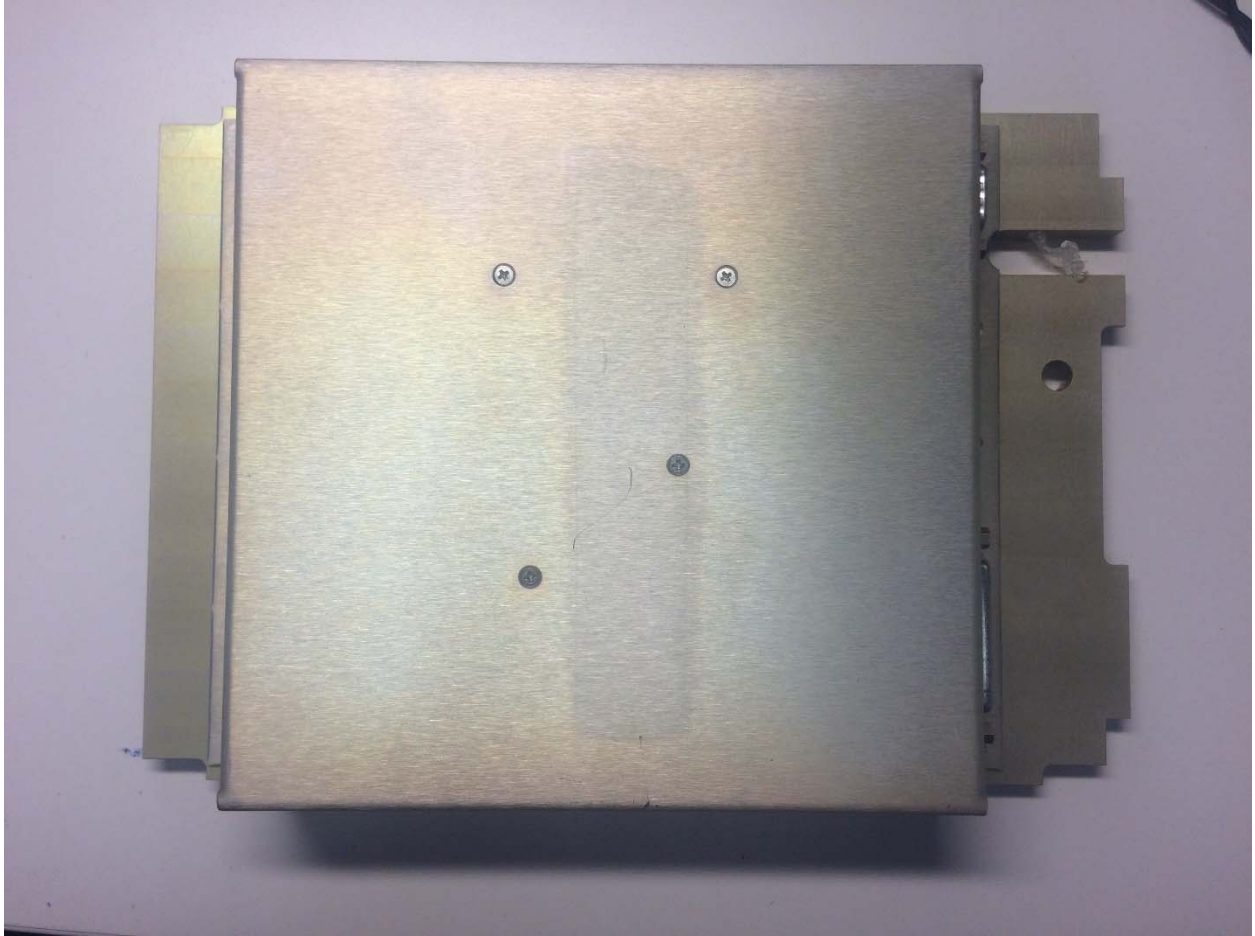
1394-F-1241 Rev J A781 PS SCD FMPA Bottom View
